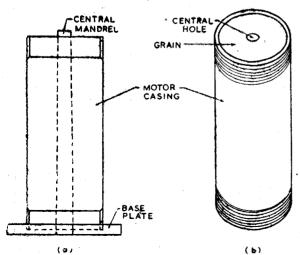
(a) Casting fixture; (b) Case-bonded grain
